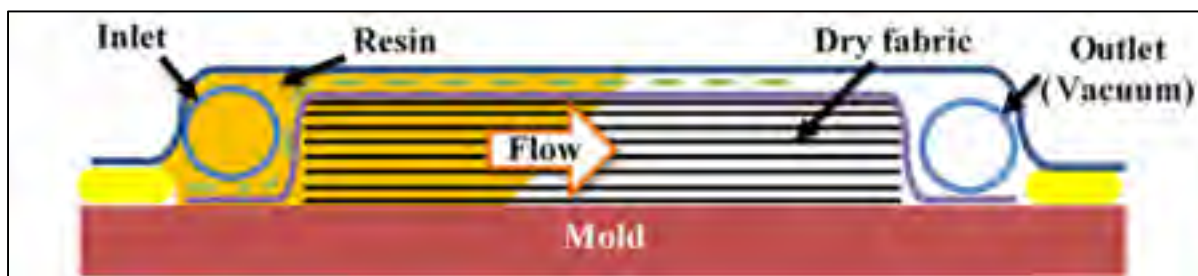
Vacuum assisted resin transfer molding (VARTM) process
